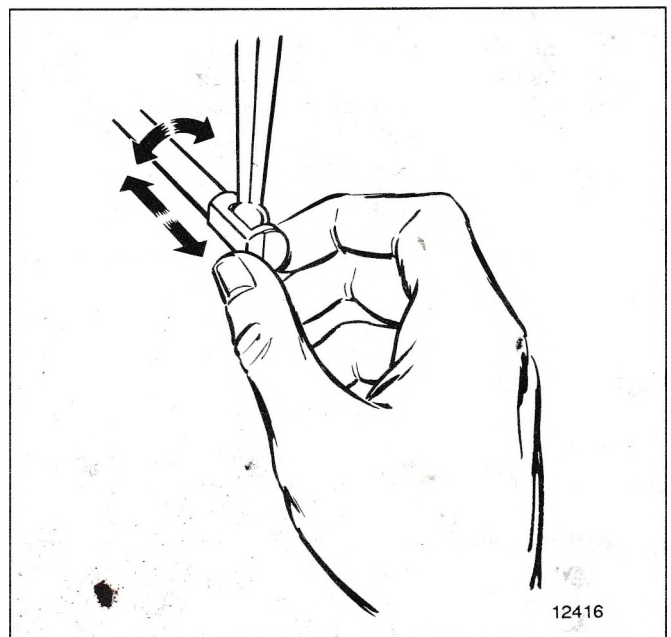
Positioning of the Bellcrank (Former Engines)
